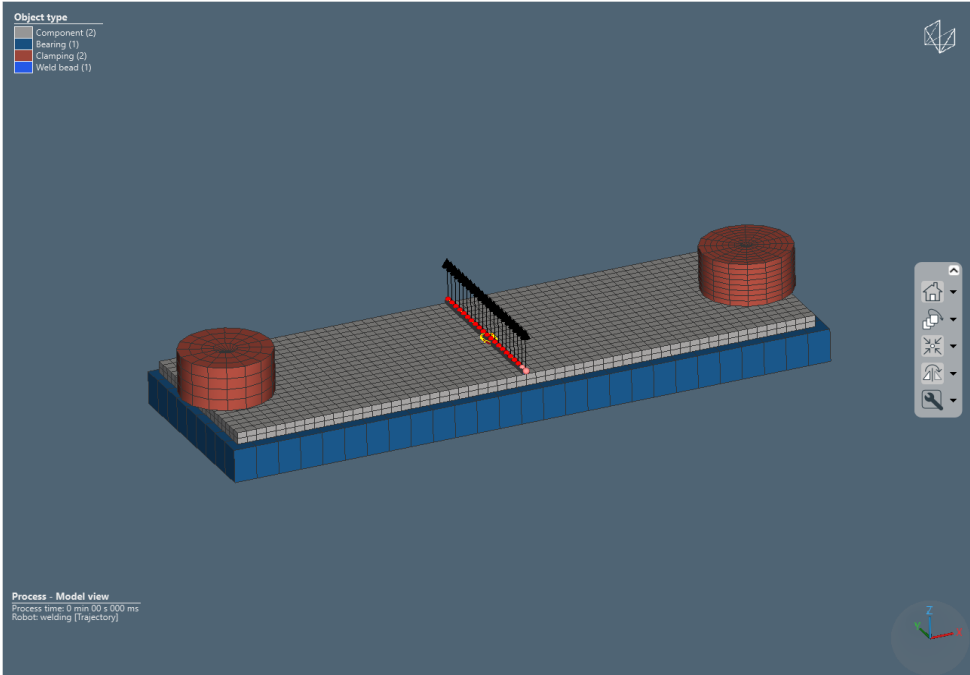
COMPONENT, BEARING, CLAMPING AND WELD BEAD
